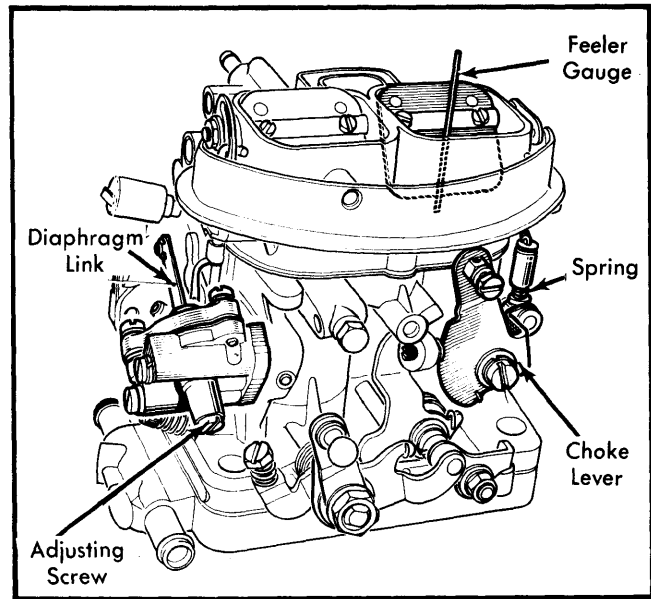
Initial Choke Valve Vacuum Adjustment (California Model Shown)
